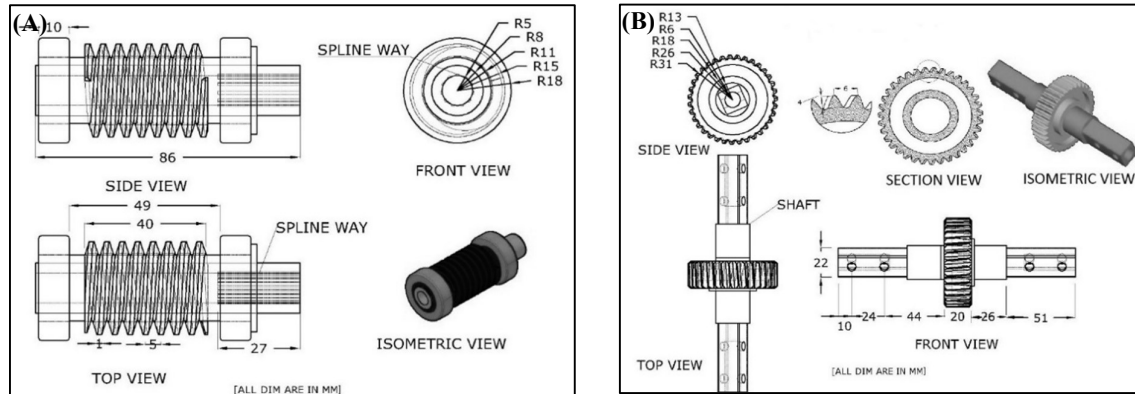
Worm-screw (A) and (B) worm-wheel of the worm-gearing.
